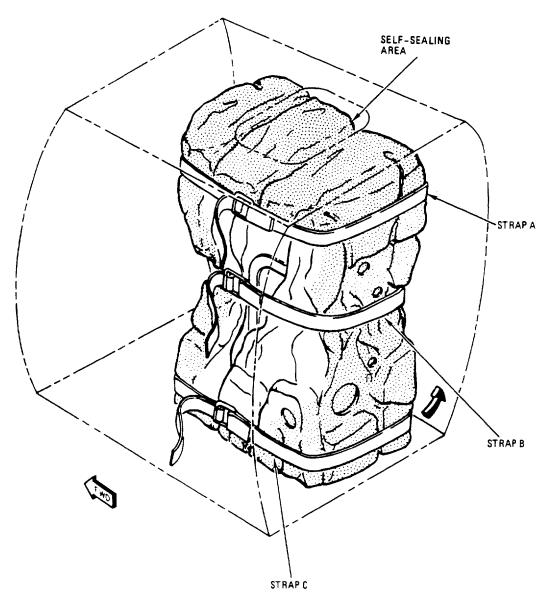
Removal - No. 2 Fuel Tank Folding (Sheet 6)
